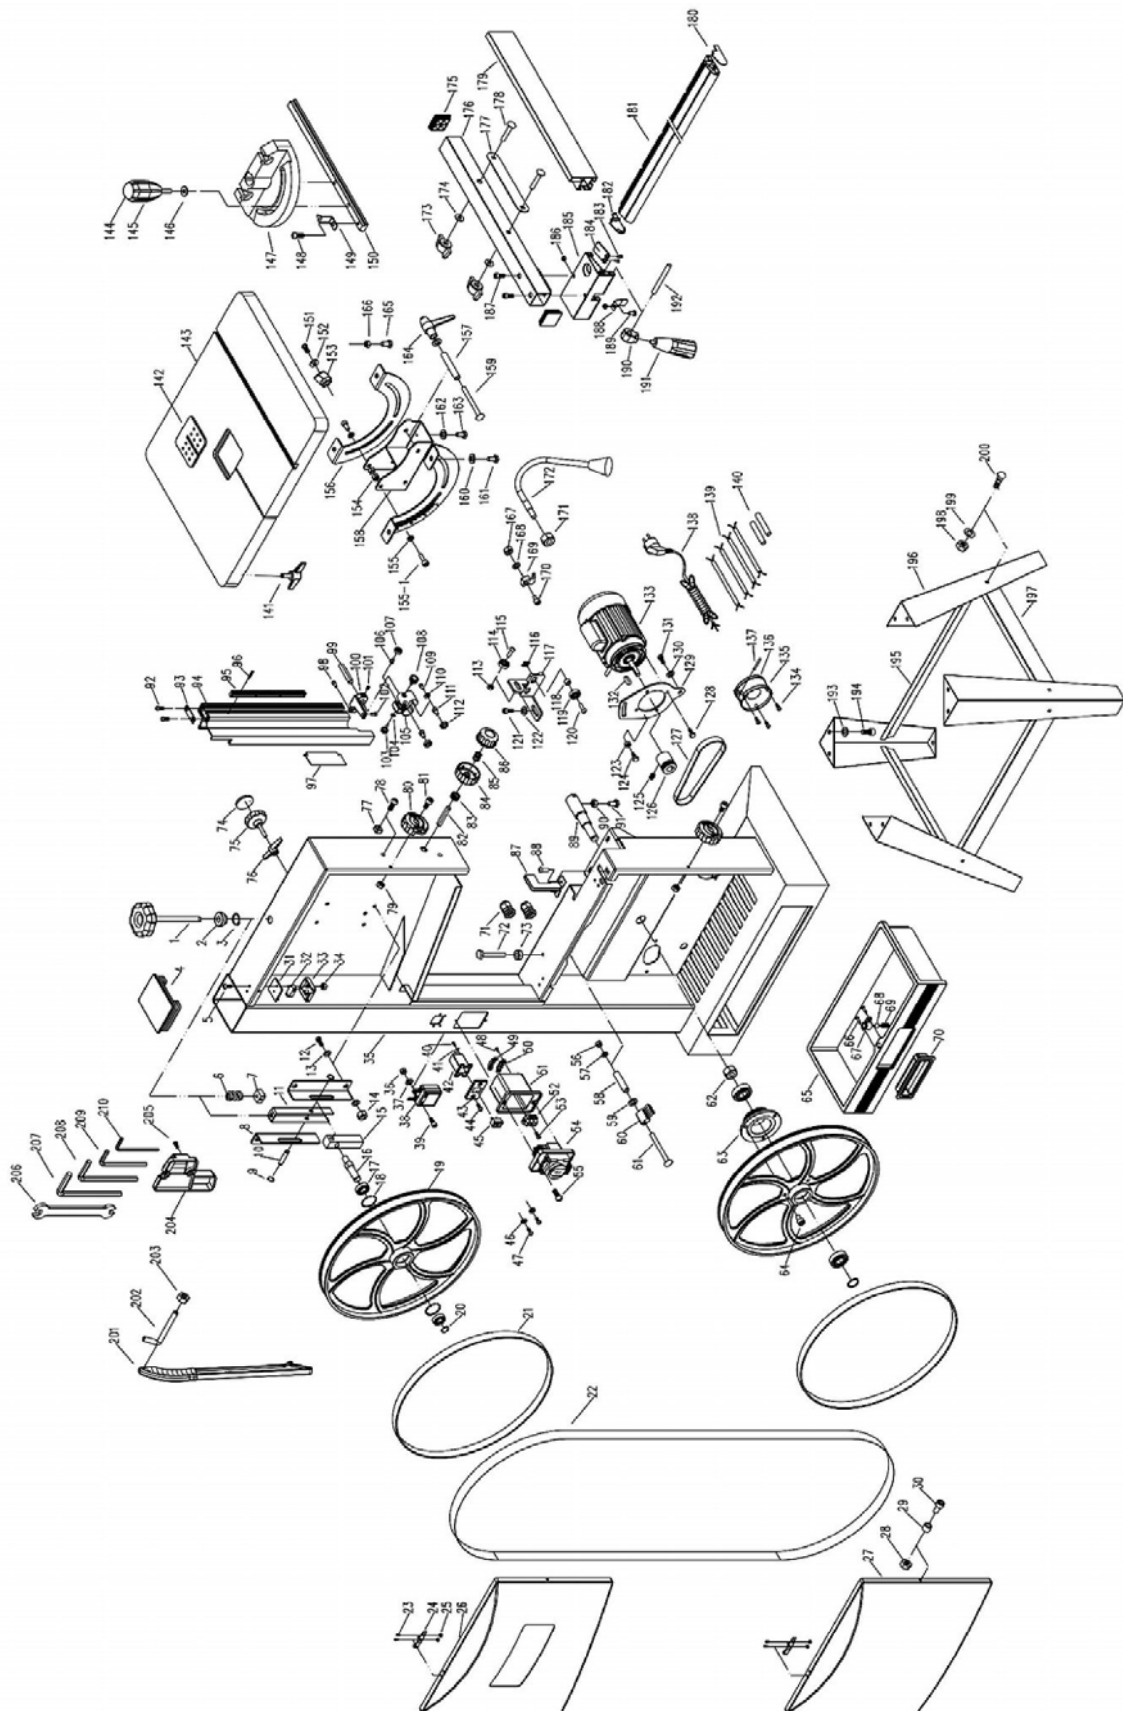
Spare parts drawing 2 - Wood Band Saw HBS 261-2
